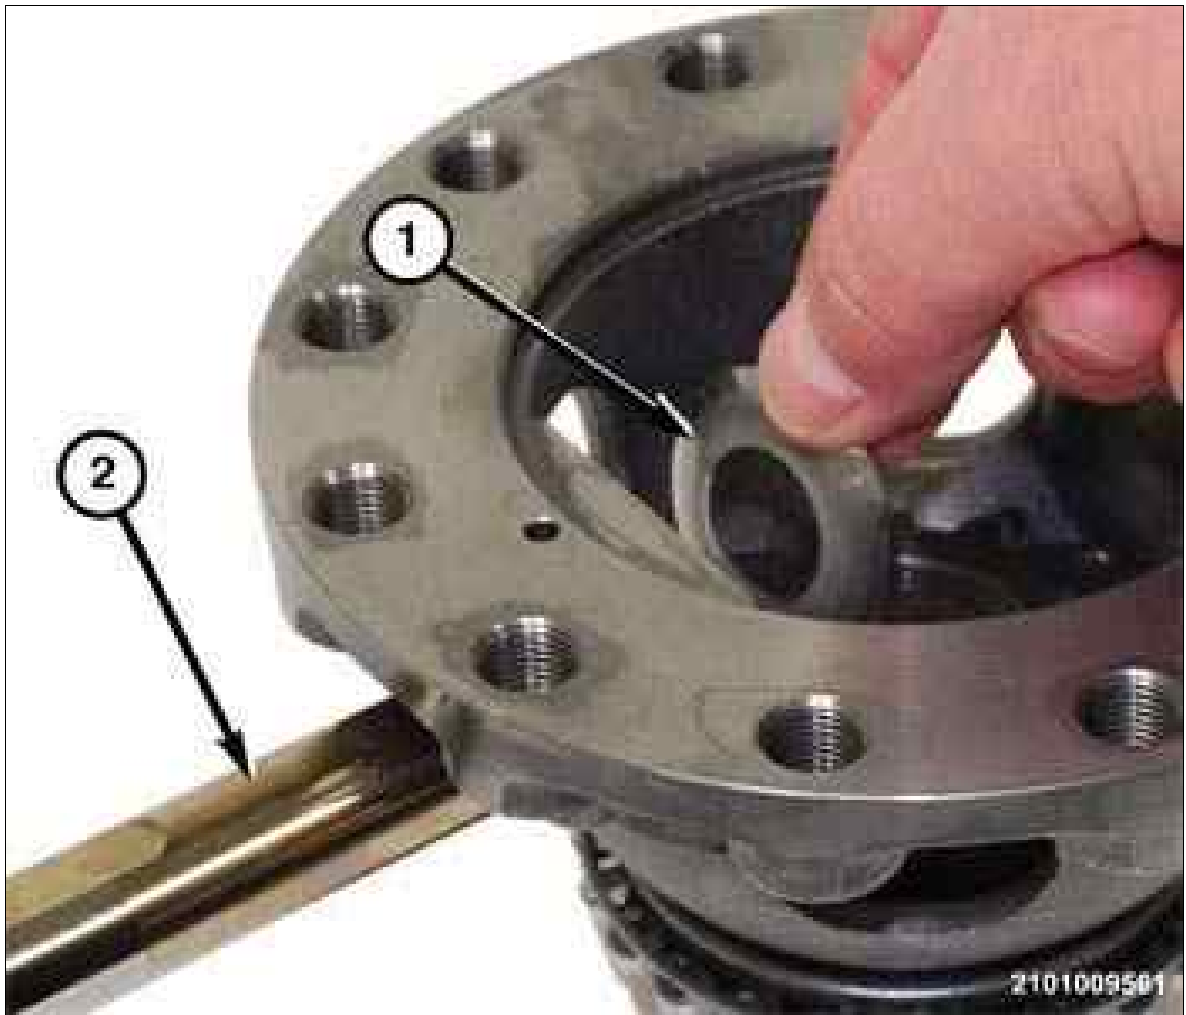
Removing/Installing Pinion Shaft & Pinion Gear 2
